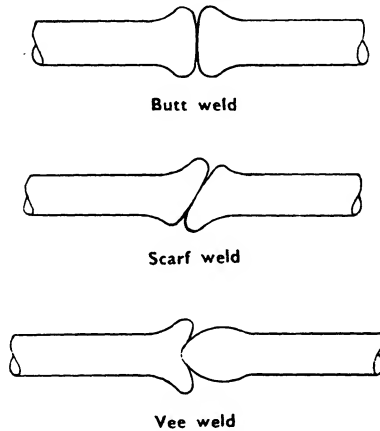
TYPES OF JOINT USED IN FIRE WELDING
